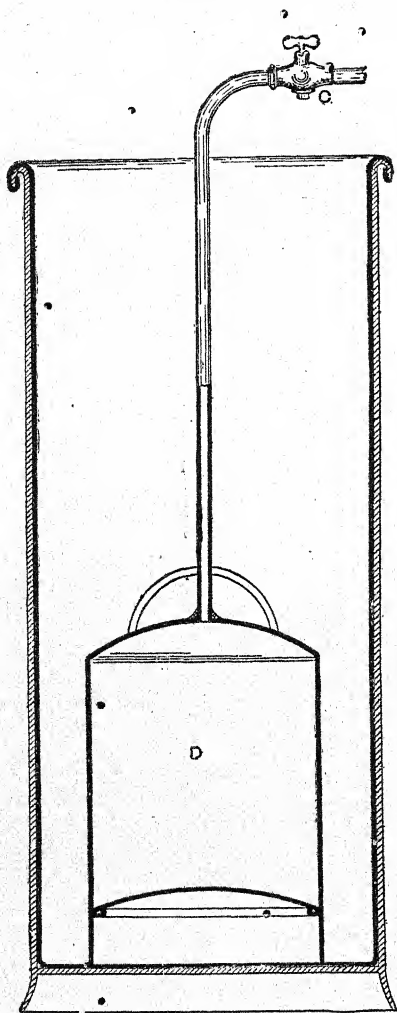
Lead-burners' Old Type of Gas-generating Machine.
